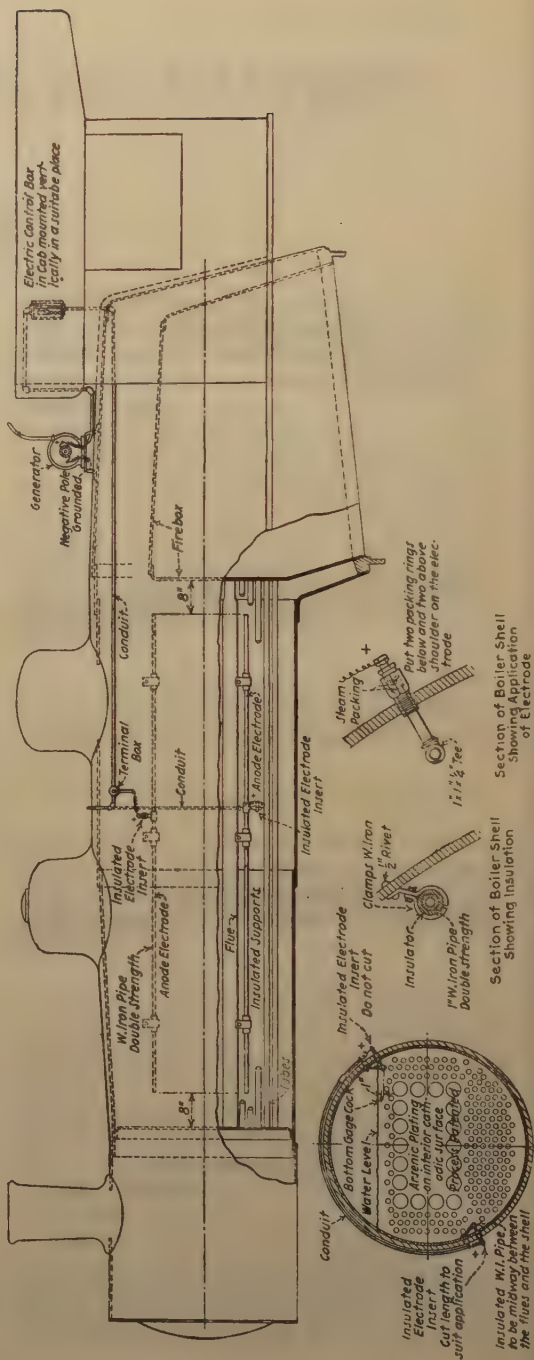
Details of application of Gunderson process equipment to a locomotive boiler.
